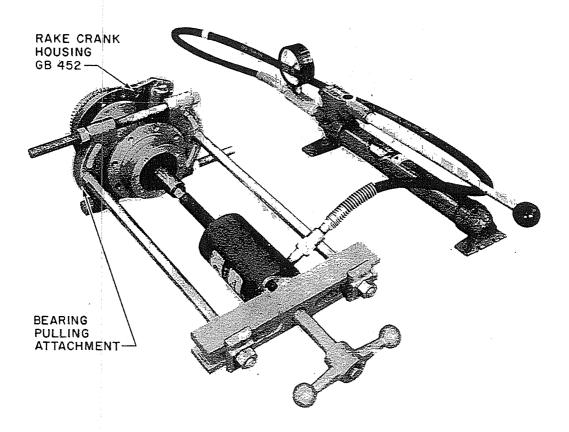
4 to 1 Shaft, Removal of Rake Crank Housing GB452
